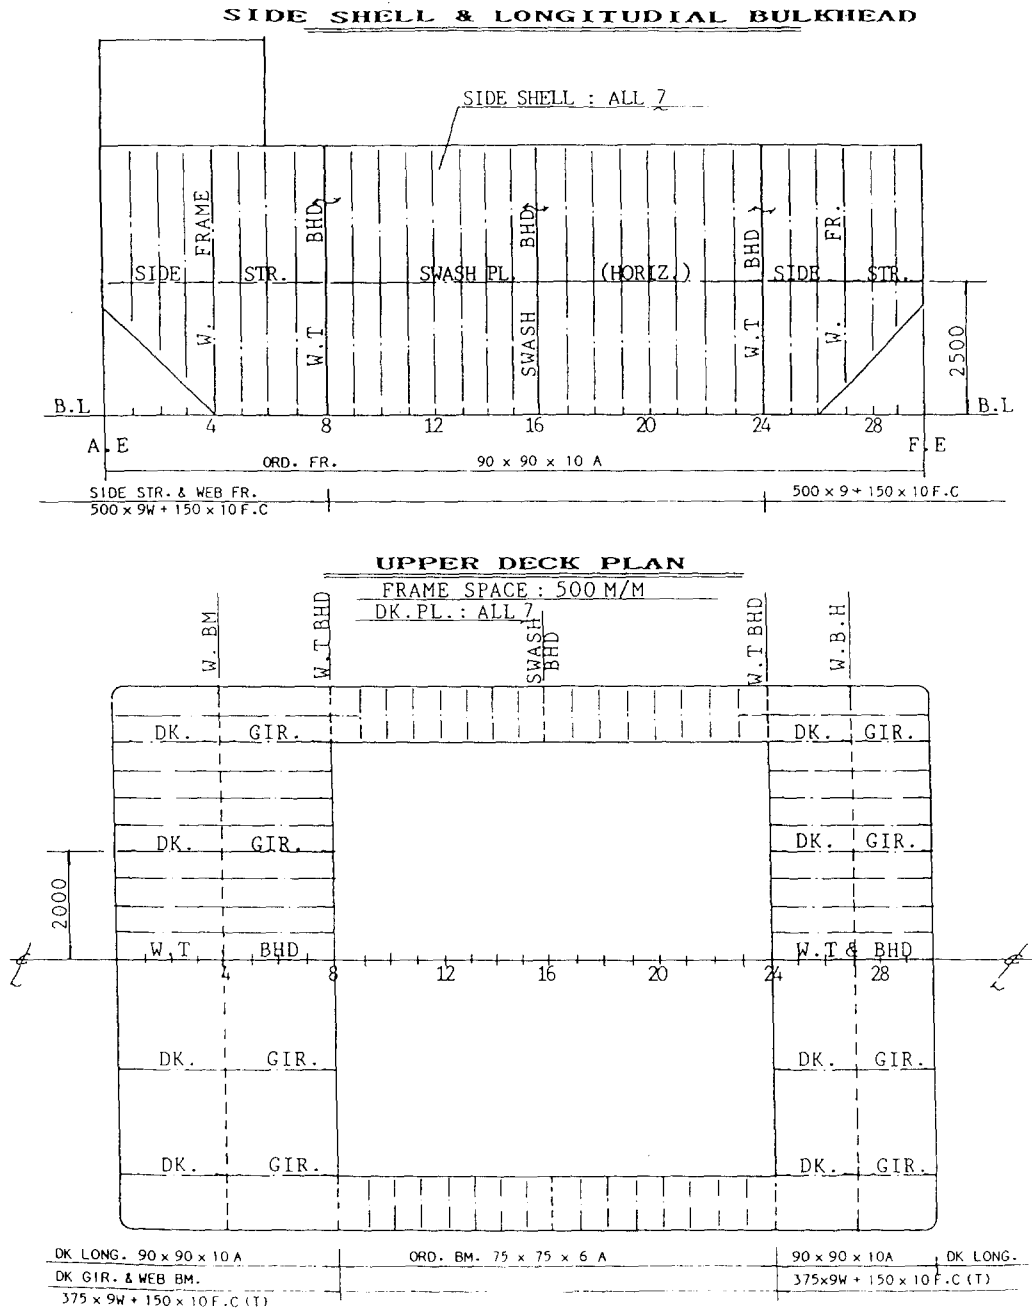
Side shell, Longitudinal Bulkhead and upper Deck plan of the single Fish pool type
